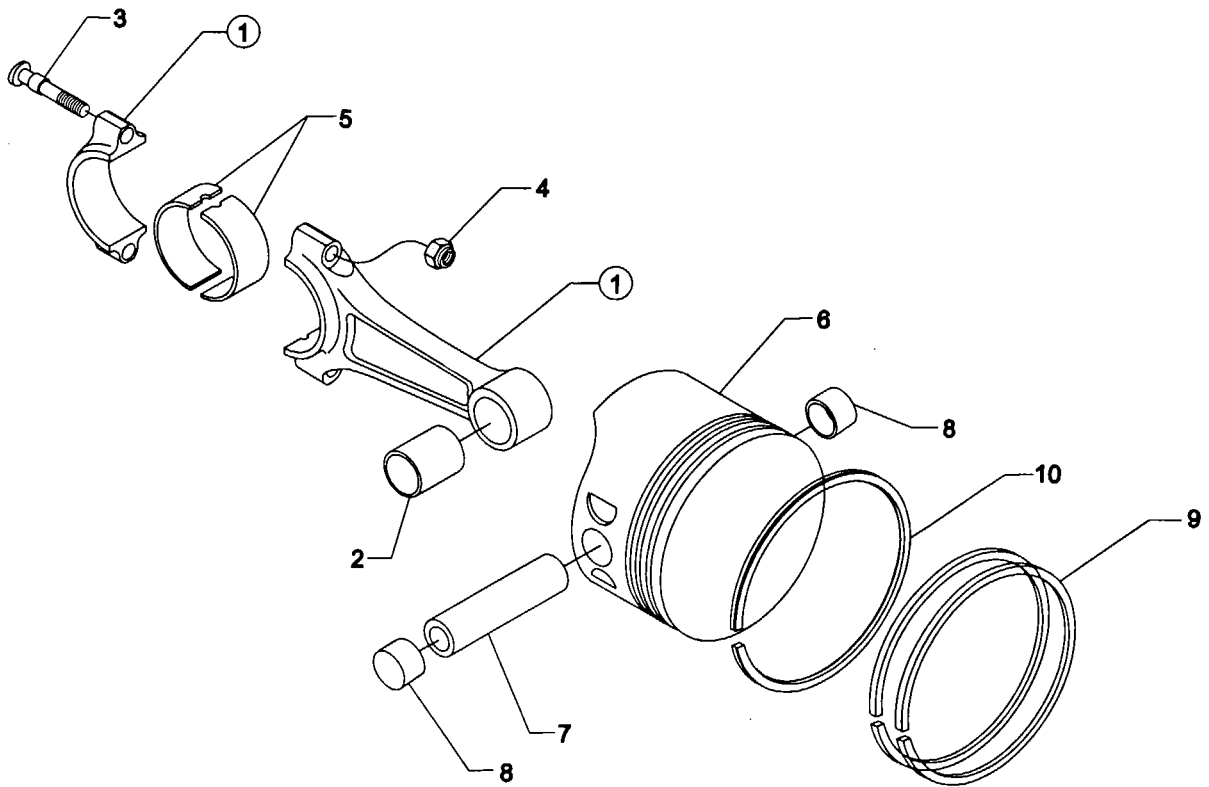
CONNECTING RODS, PISTONS AND RING ASSEMBLIES
